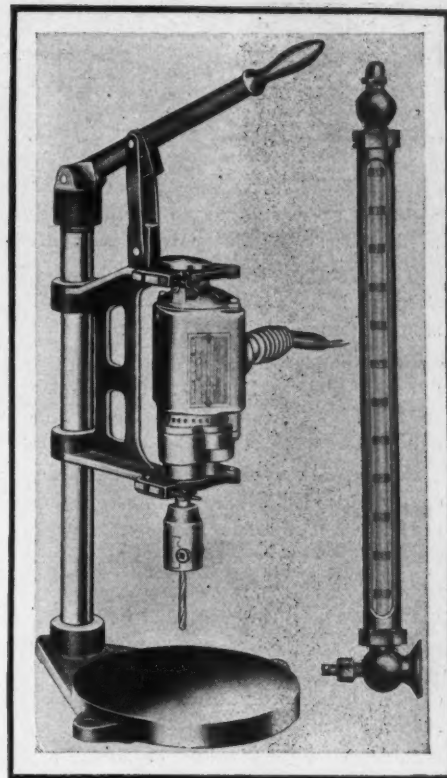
DUNTLEY DRILL STAND AND IMPERIAL FUEL GAUGE
